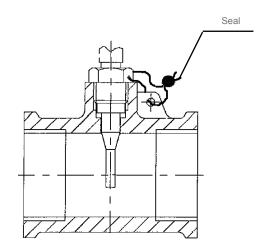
Sealing the directly mounted temperature sensors (DS and DL type).
